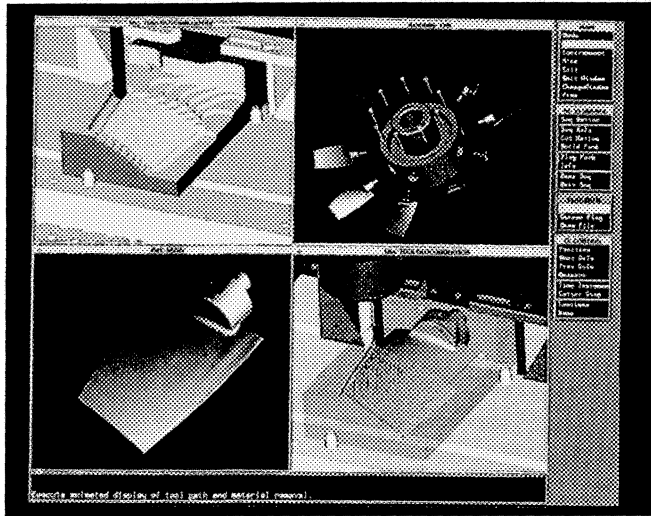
Machining Using Pro/ENGINEER and Pro/MANUFACTURING
